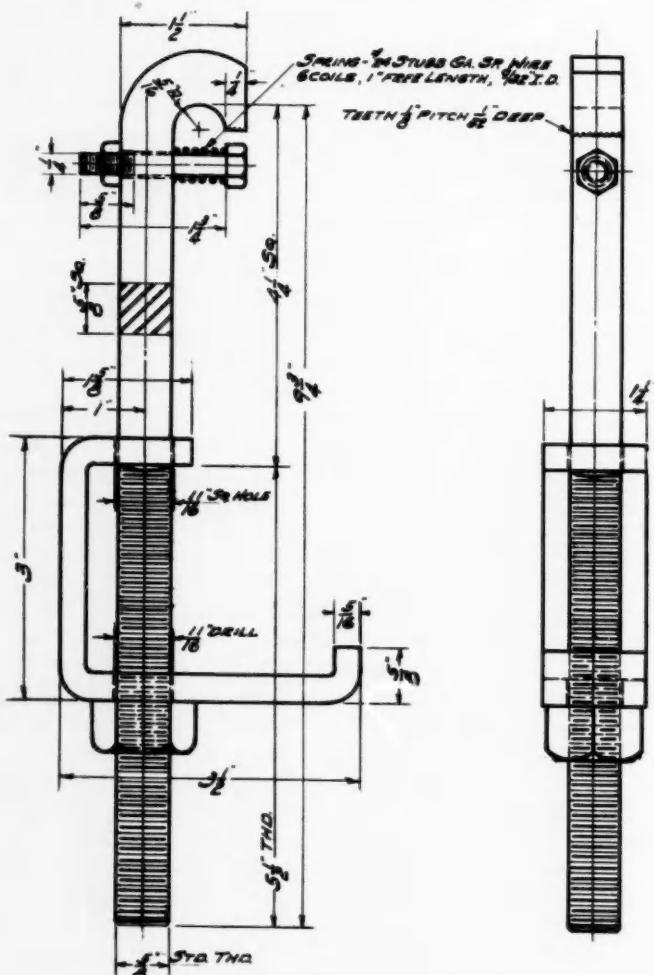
Device to Hold the Axle to the Chassis During Drop Test
